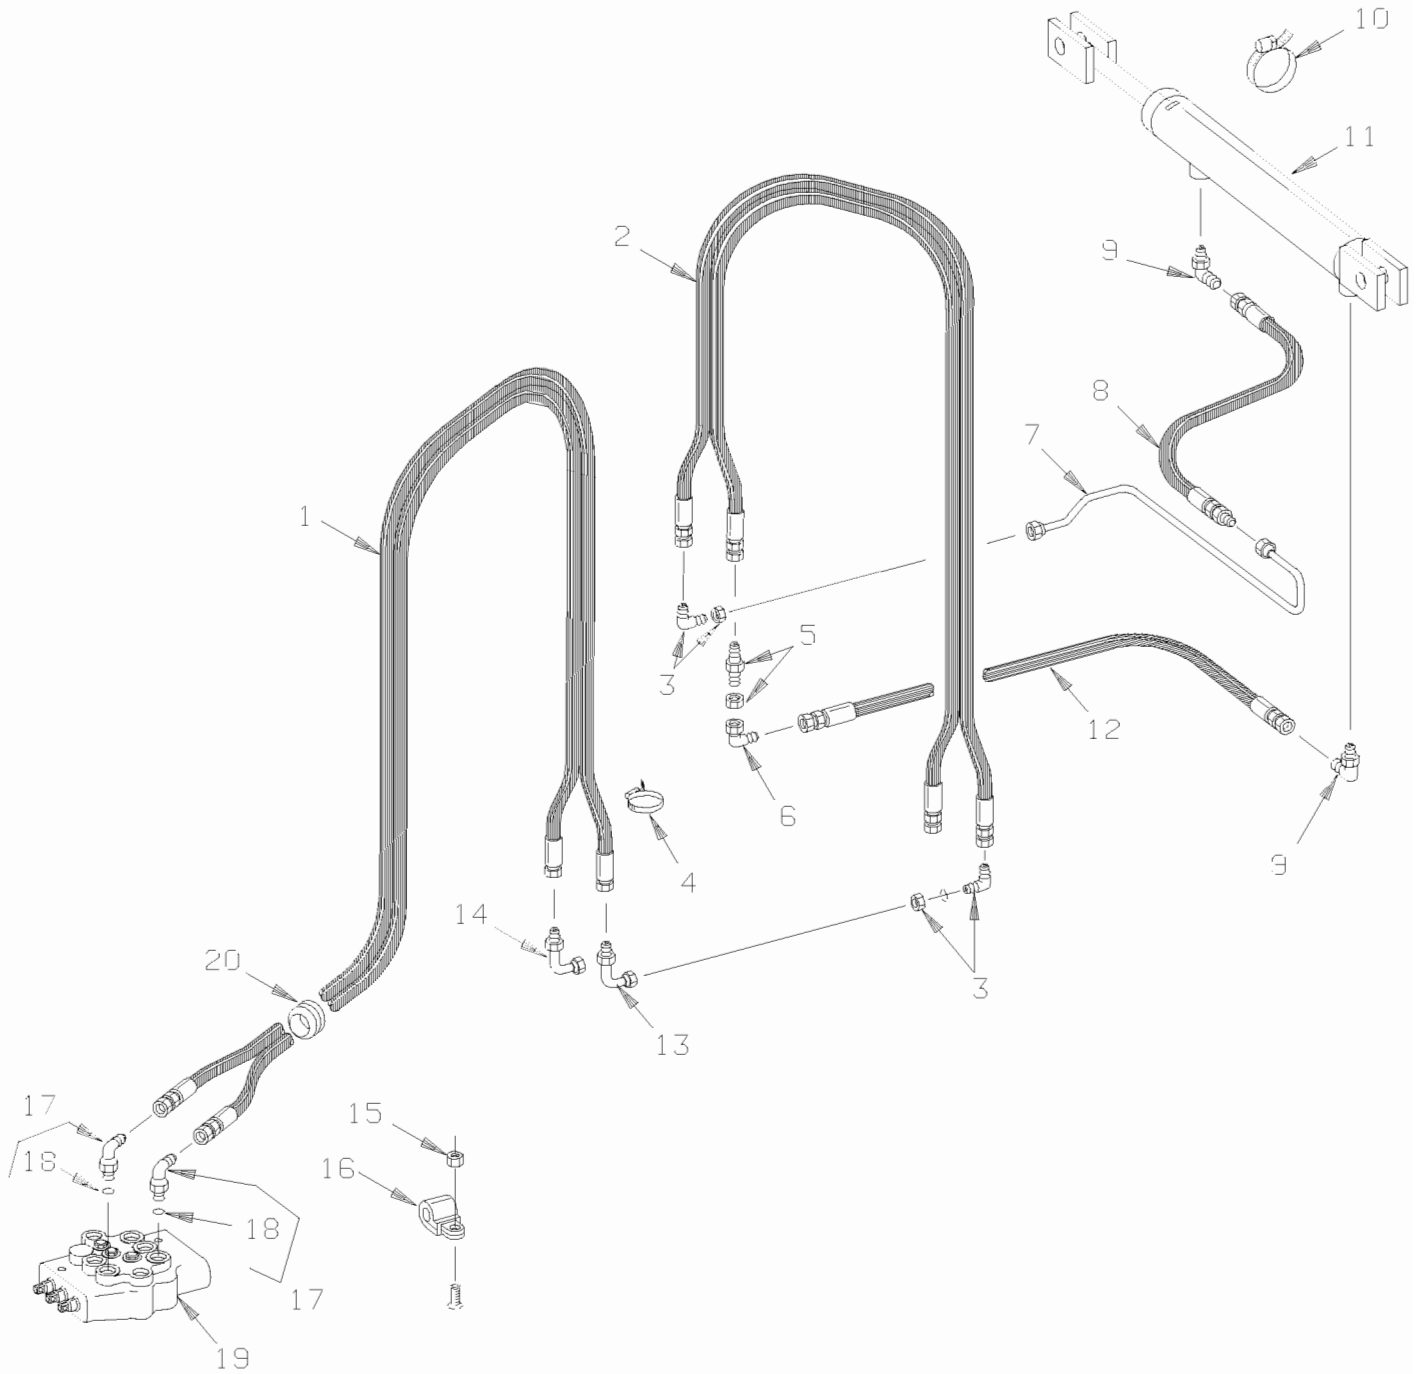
SC-20 TILT CYLINDER ASSEMBLY (22015-01)
